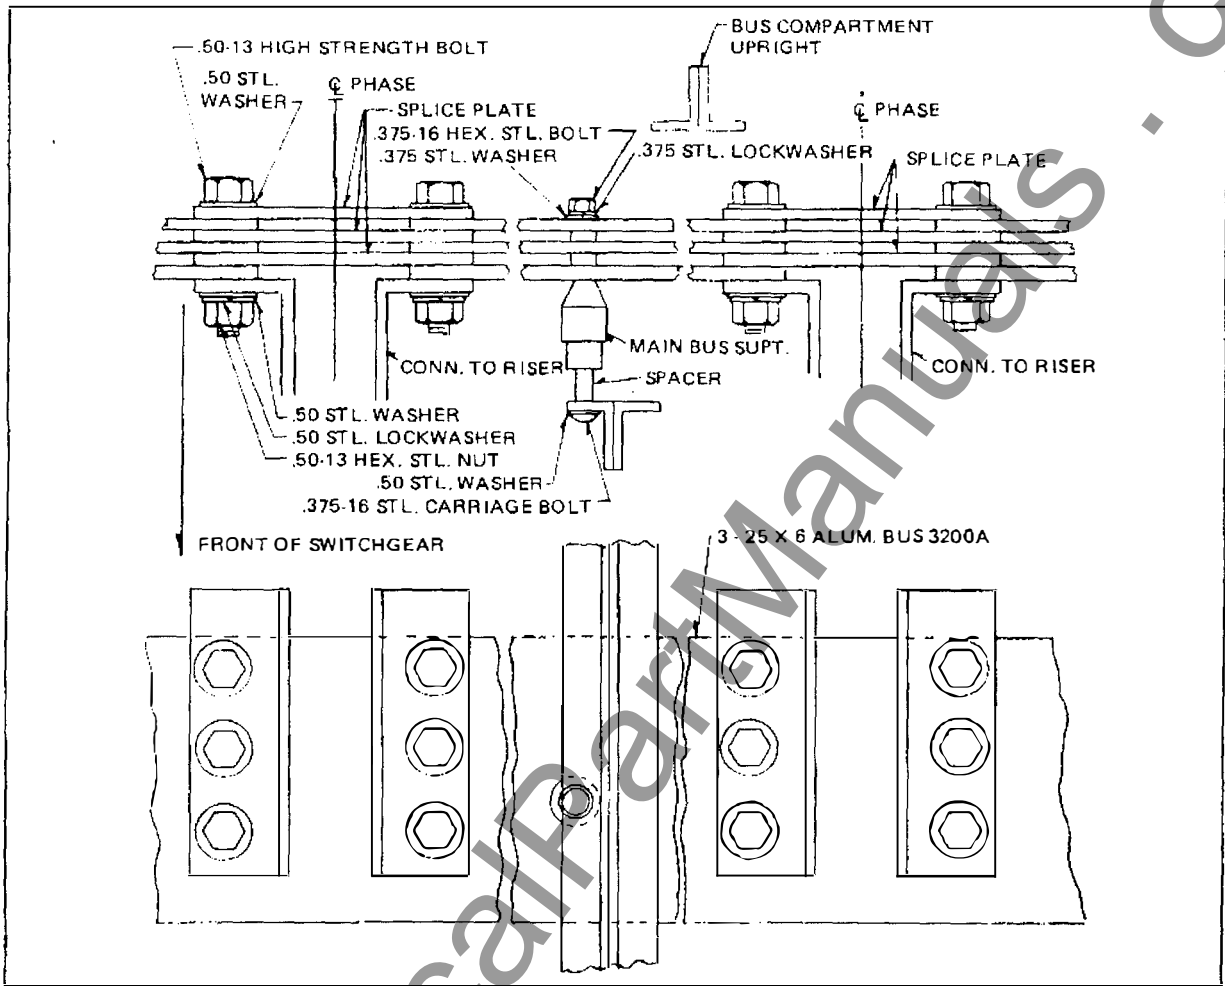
Field Assembly of Joints in 3200 Amp Bus
